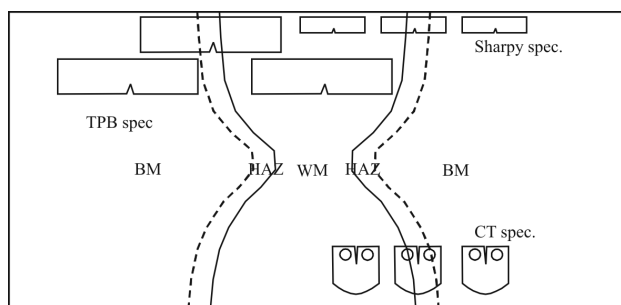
Scheme of testing sample of double “U” weld metal and specimens sampling <sup>6</sup>
